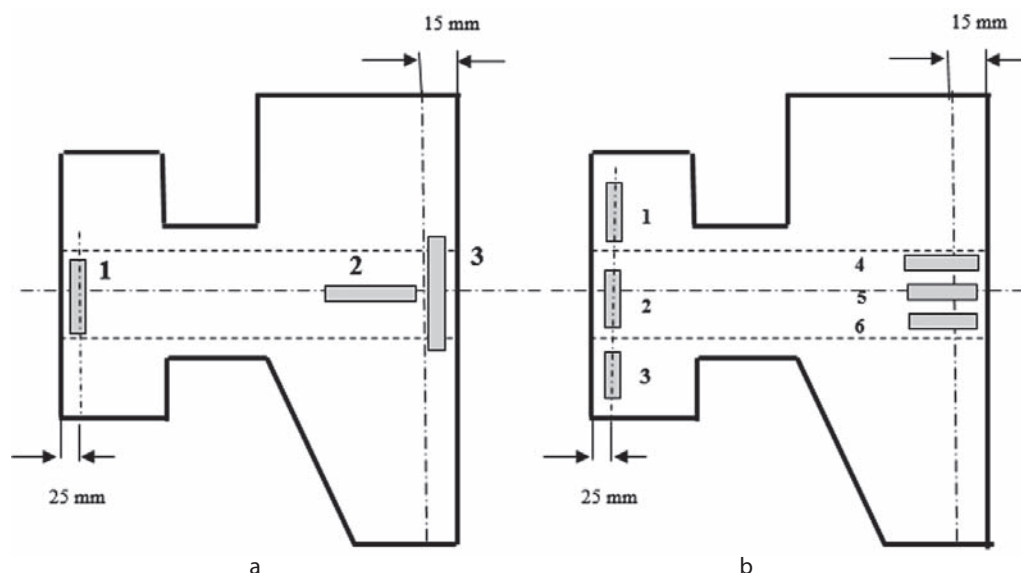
The places of sampling of piece of bonnet type: a - for tensile testing; b - the bending shock test
